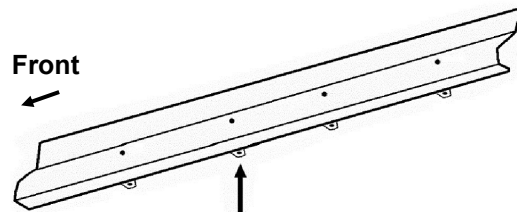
Passenger Front Mounting Bracket (PFM) Installed
